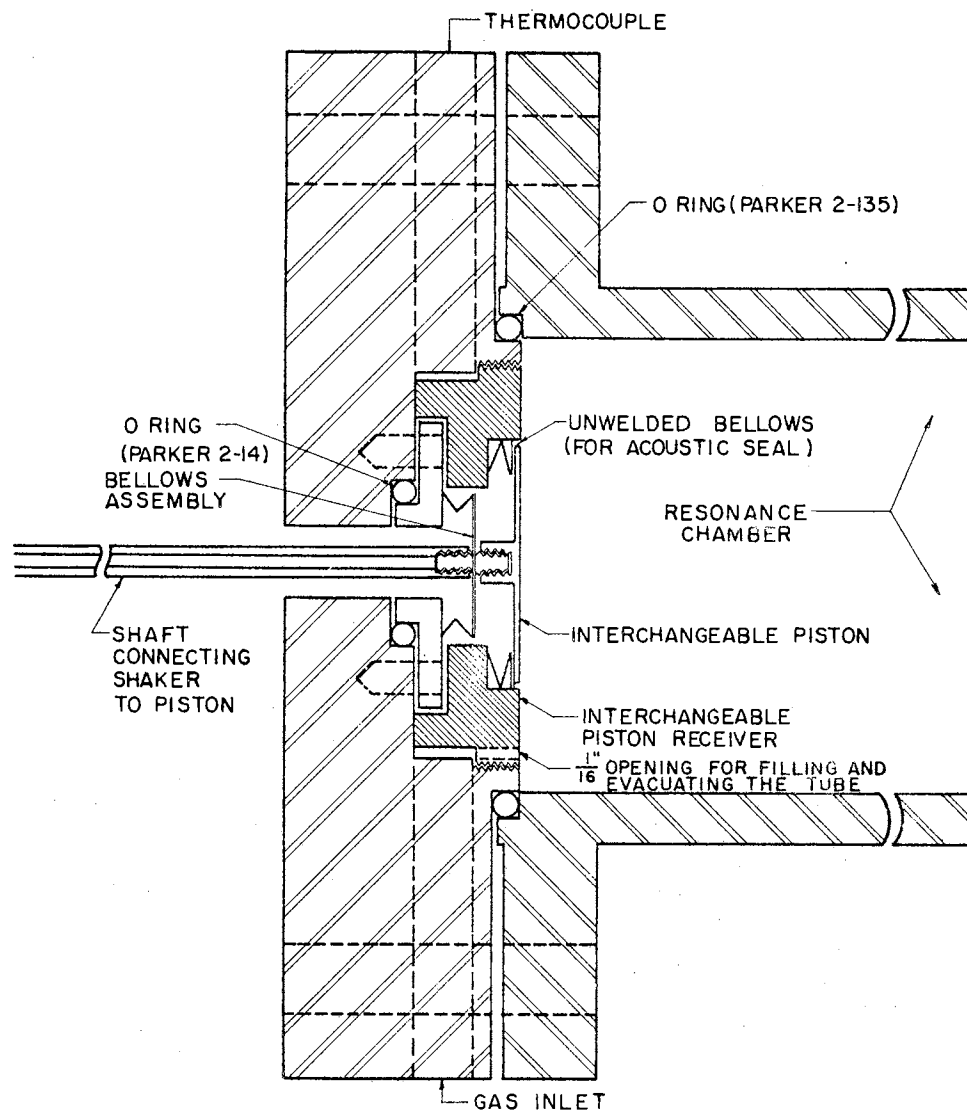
Driver assembly, showing the 1 inch by 4.375 inch stainless steel body with the inconel bellows attached. A Conax thermocouple fitting is to be mounted as shown, opposite the gas inlet tube. An interchangeable piston receiver is provided in order to determine the optimum piston design. The unwelded "bellows" is to prevent radiations off the backside of the piston from entering the resonance chamber.
